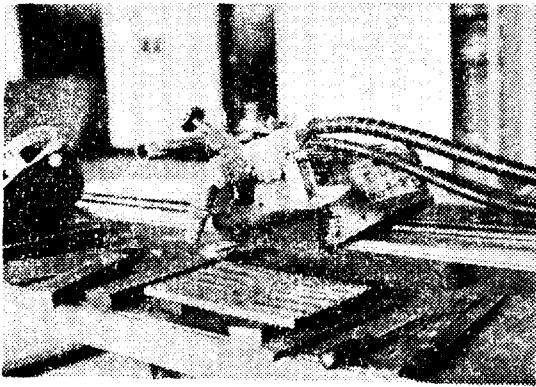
FCAW welding head mounted on the automatic carriage
